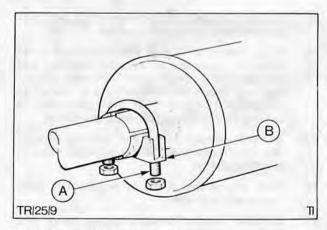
Typical 'U' bolt clamp joint A – 'U' bolt B – Clamp
